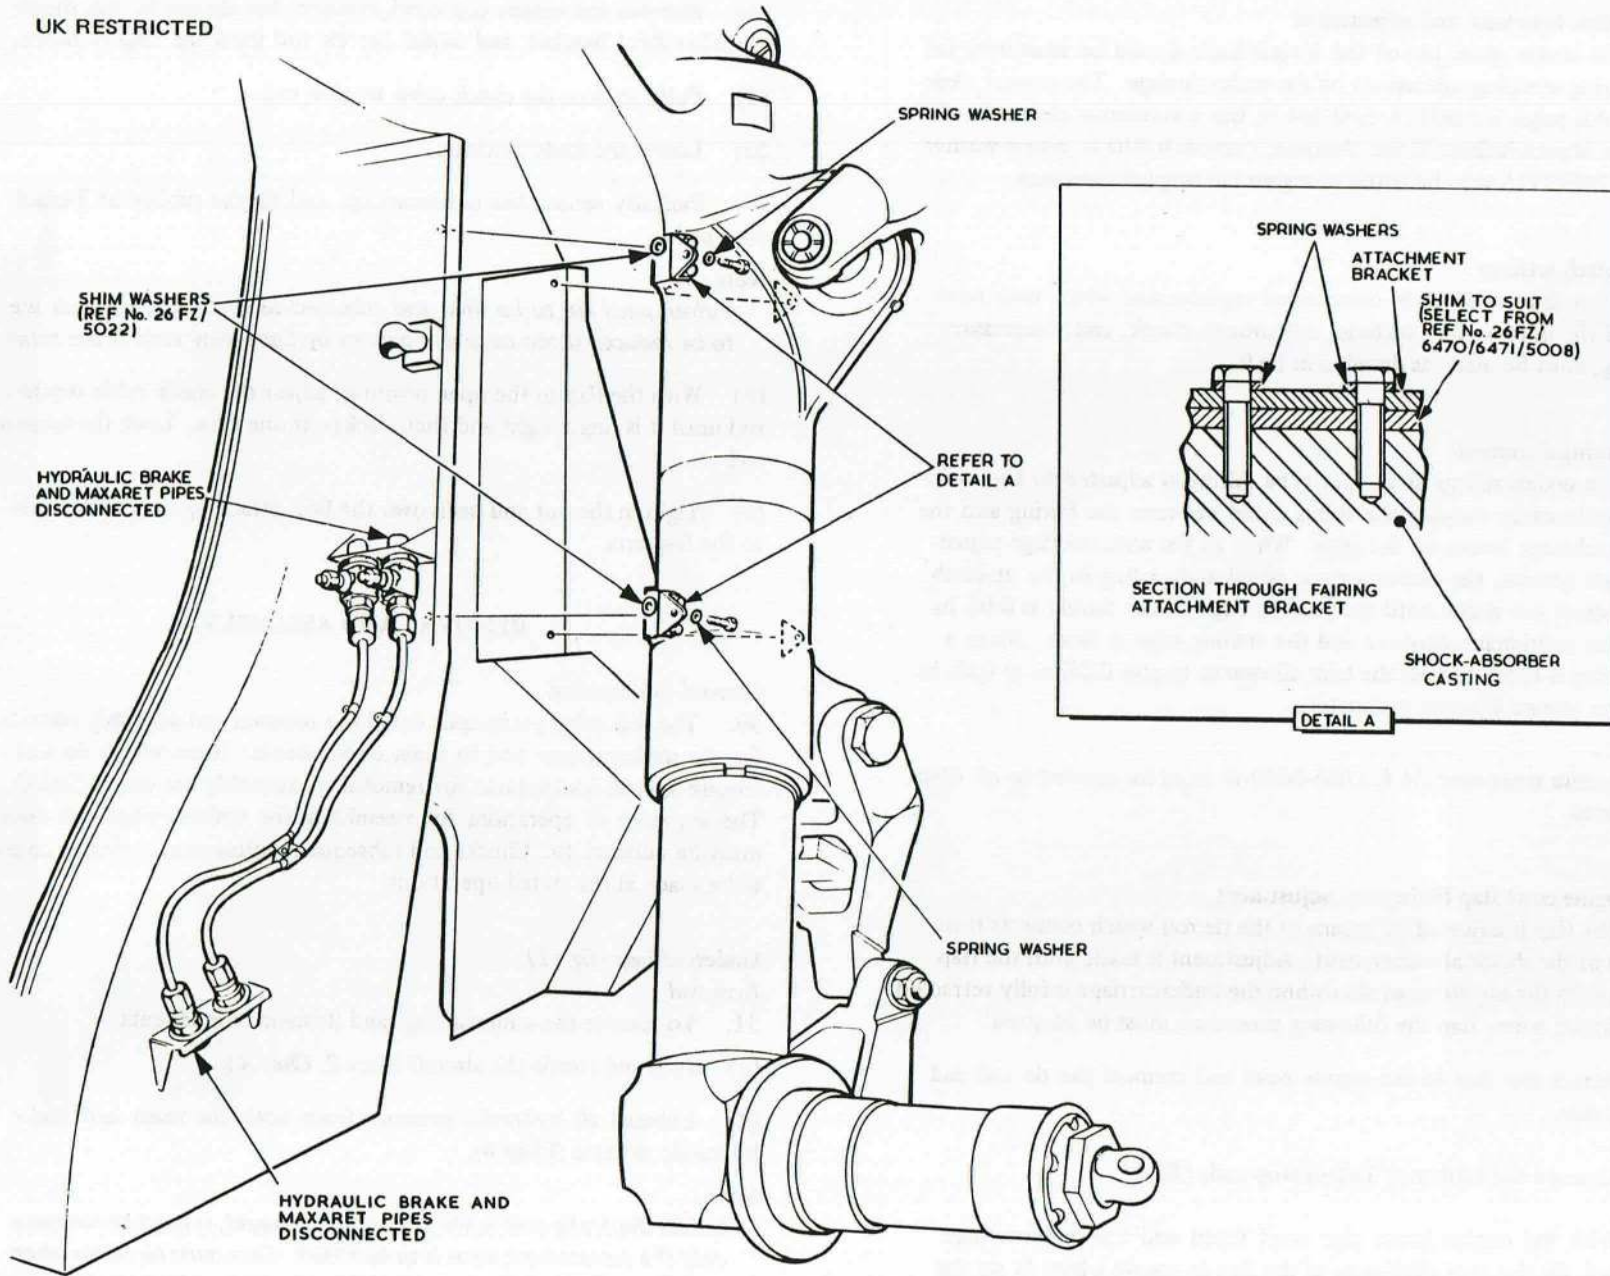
STRUT FAIRING-REMOVAL AND ASSEMBLY
